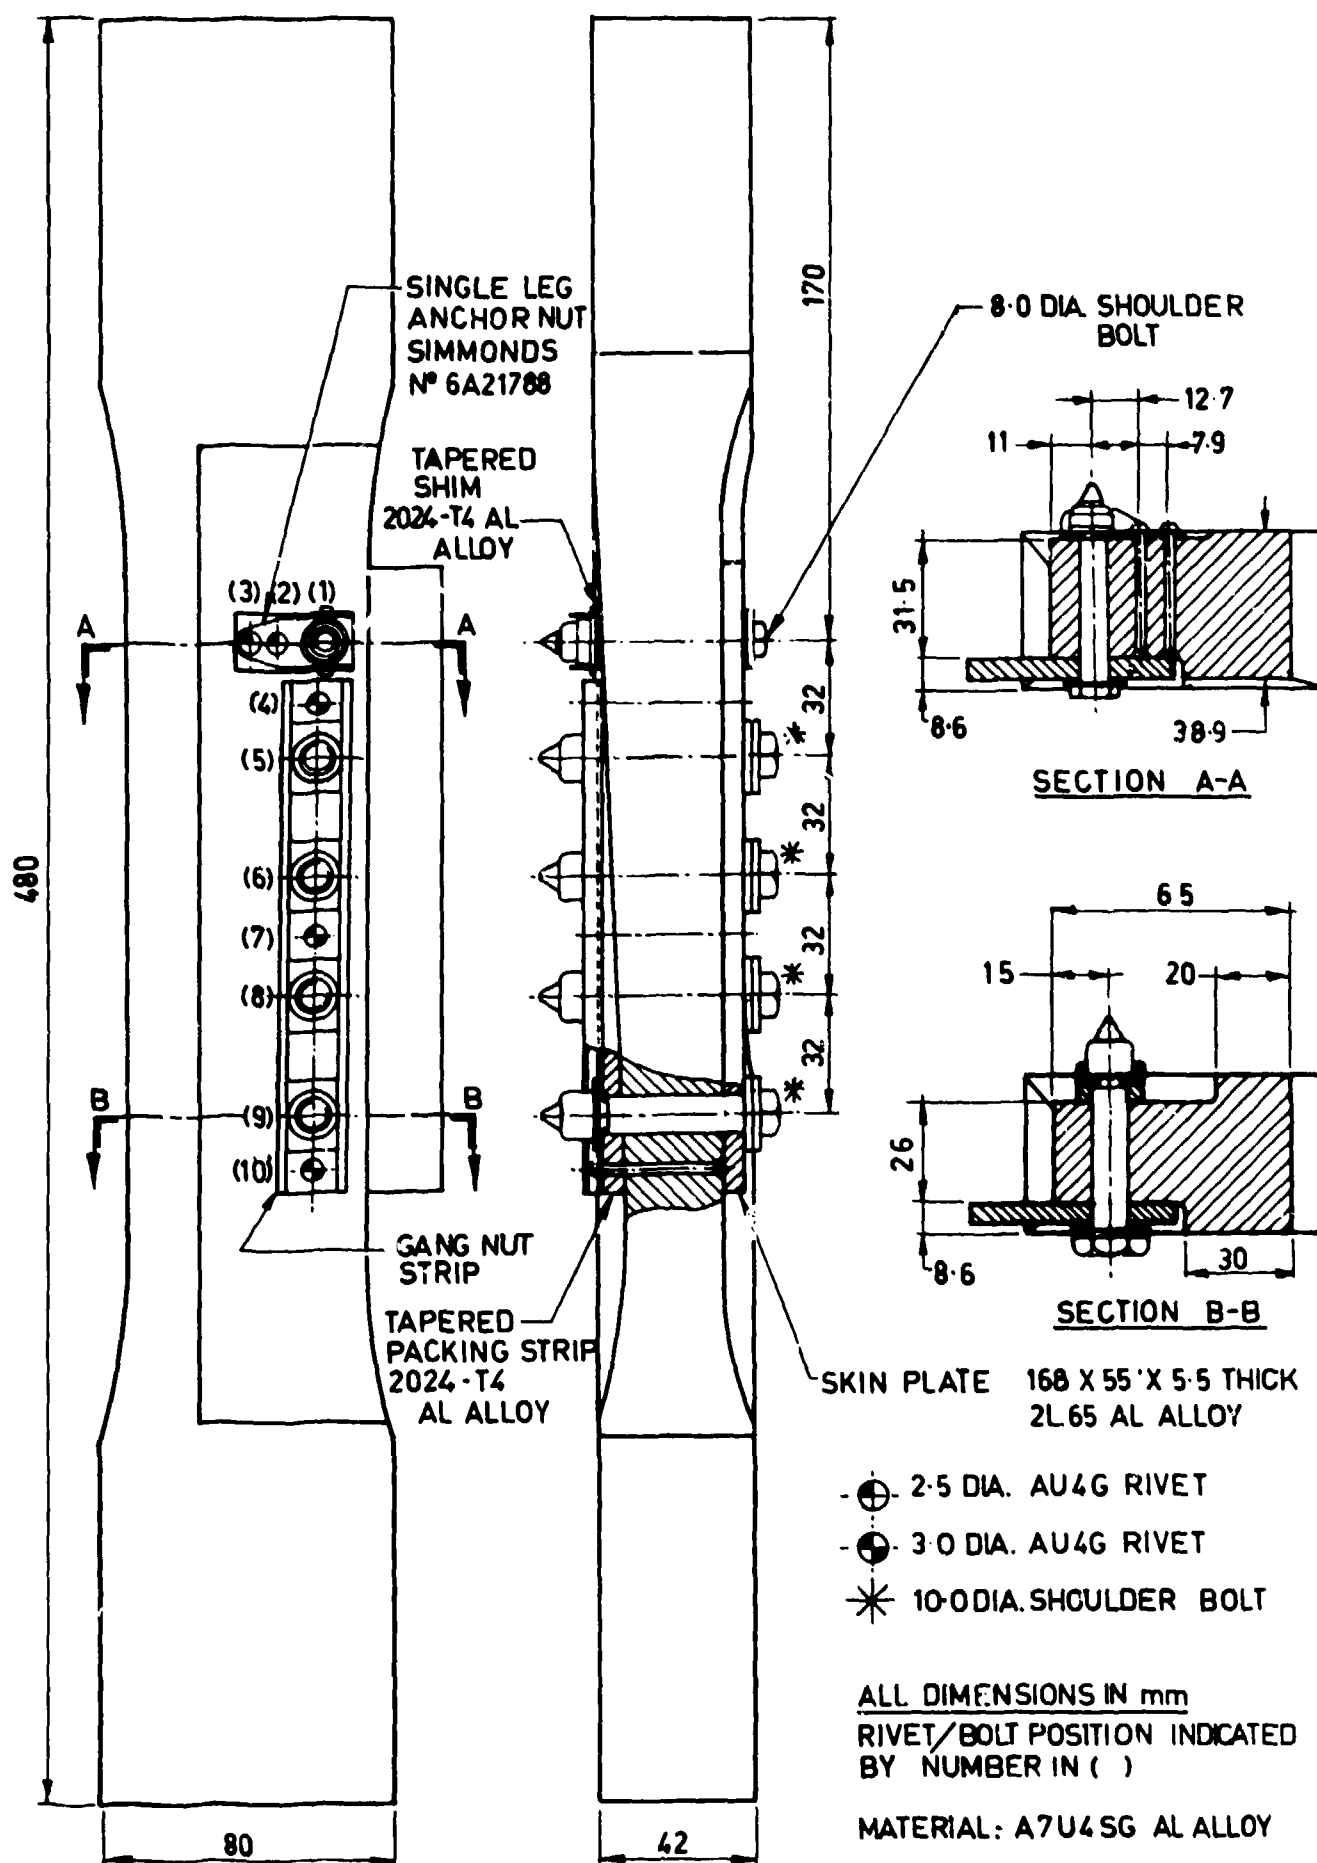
MIRAGE SPAR LOWER REAR FLANGE FATIGUE SPECIMEN
